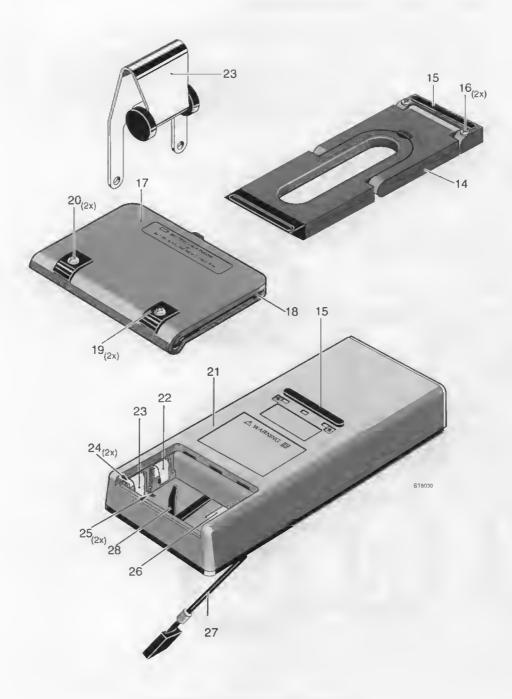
Battery contact assembly Stand assembly Battery cover assembly Bottom assembly
